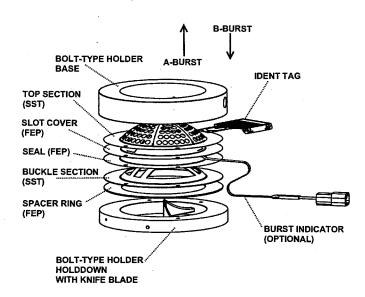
Rupture Disc Assembly (Bolt-Type Shown)
